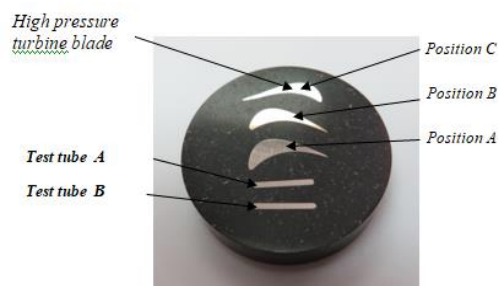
The appearance of the pressed pieces of the spatula and test tubes
